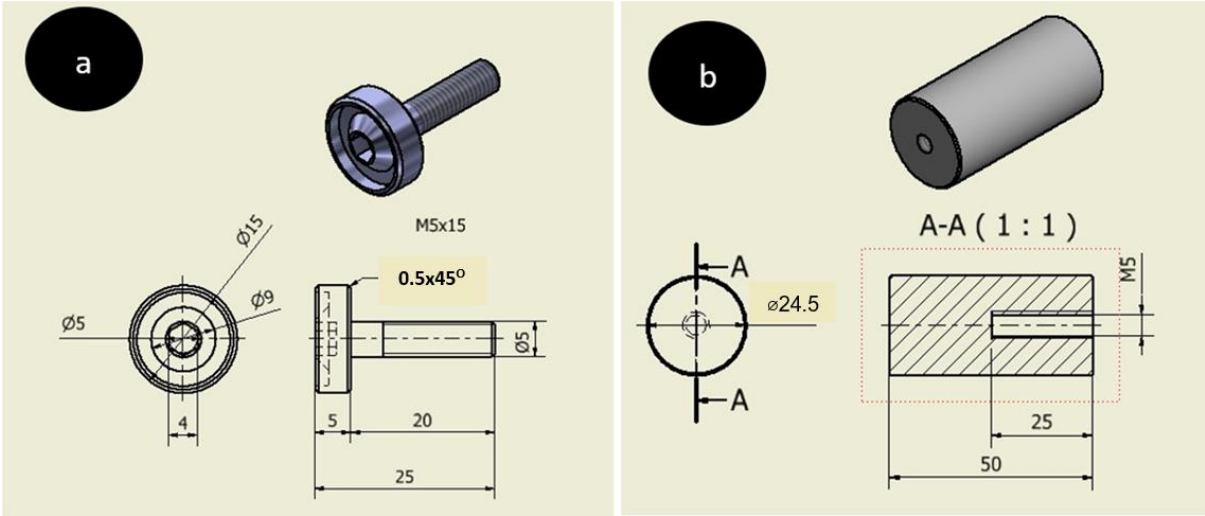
(a) Probolt bolt design, (b) Jig for design of probolt bolt.
